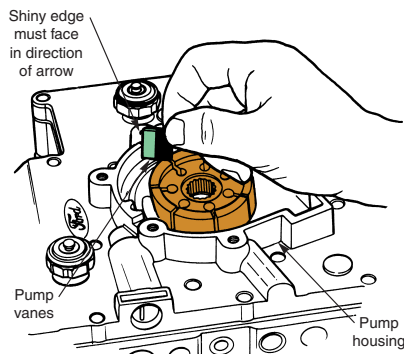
The pump must be carefully reassembled to provide proper pressures and long service. This vane pump is mounted in the side valve body of a common transaxle. (Ford)
